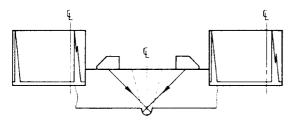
Use of guide strip for checking weld root and plotting excess penetration or incomplete root penetration
